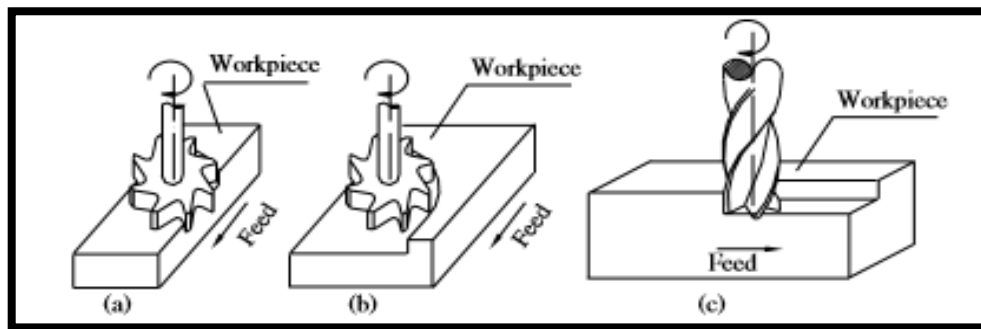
Face milling: a) conventional face milling b) partial face milling c) end milling
